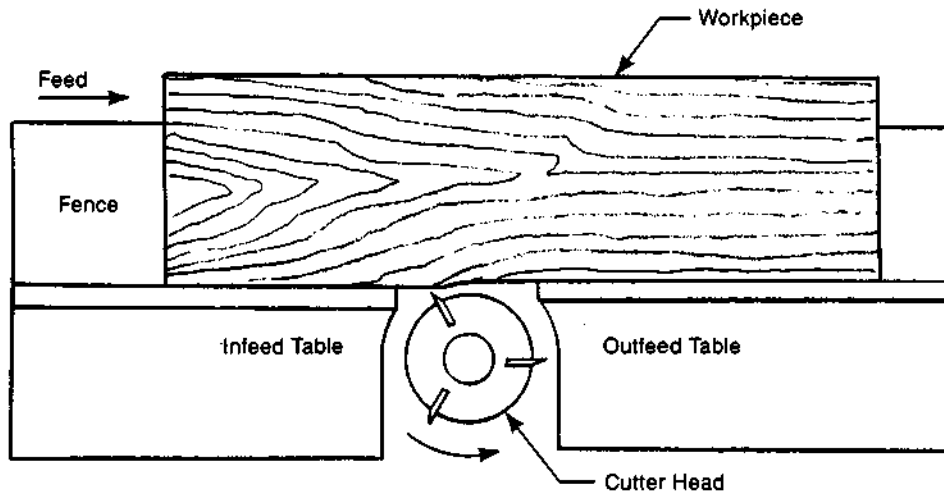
B2b Jointing puts a smooth edge on a workpiece. The operation is commonly manually controlled.
